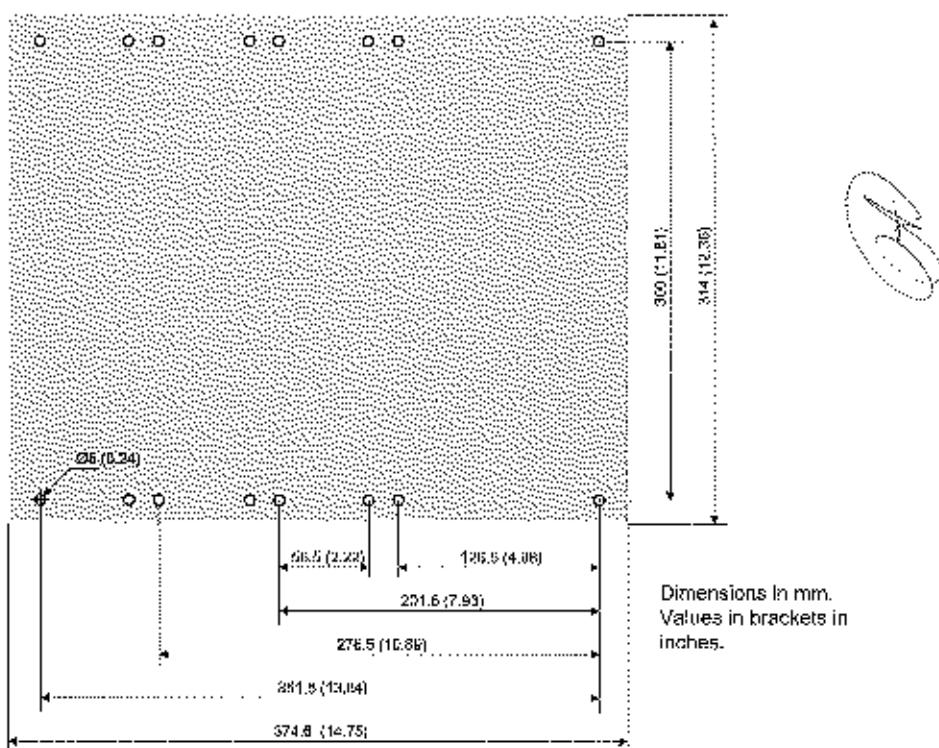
Drilling Pattern of a 5/6 Surface-Mounting Device – 1st Device Row
